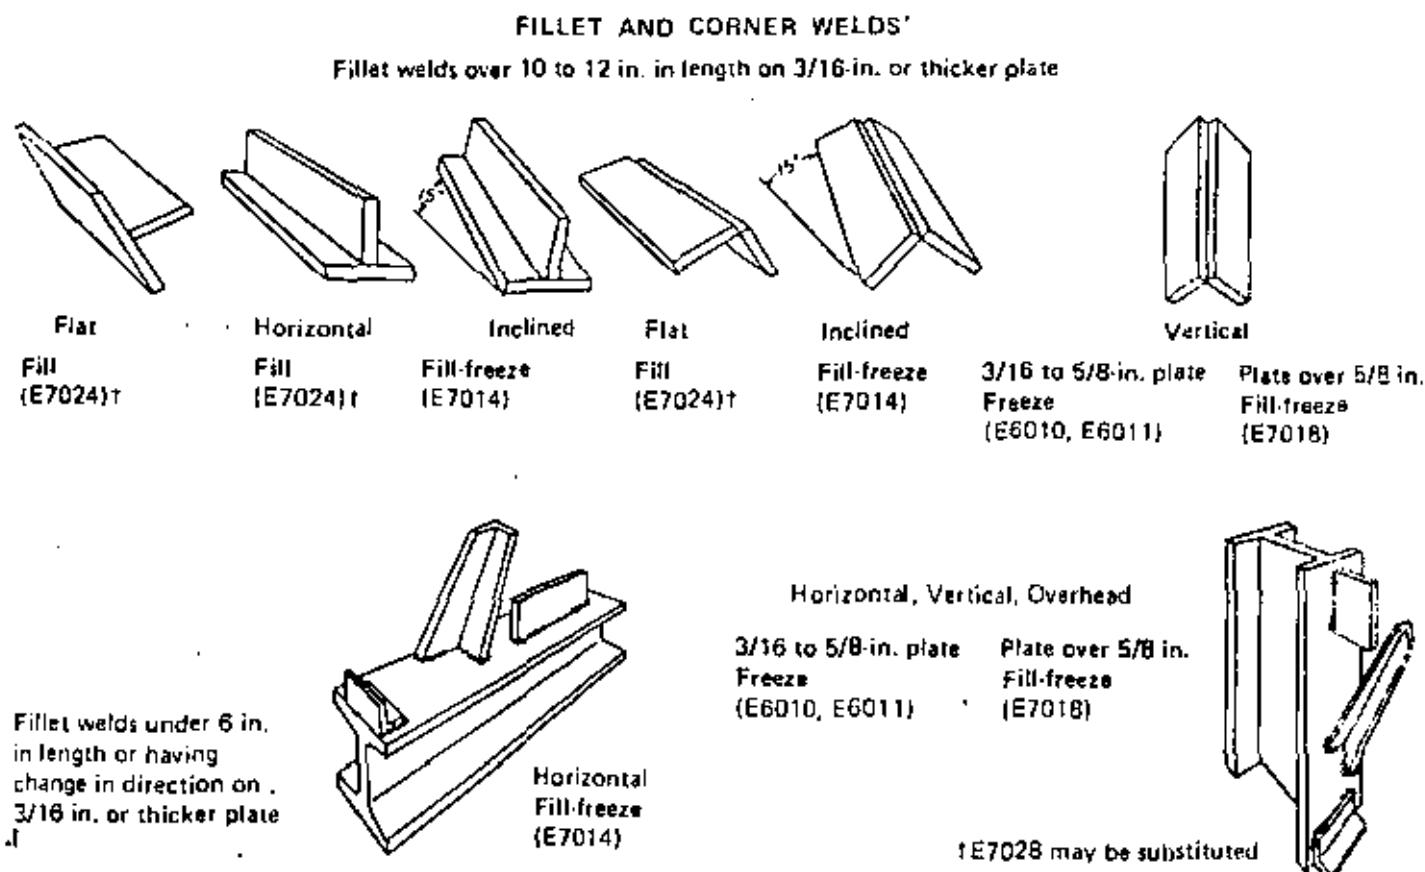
Guide to selection of electrodes for fillet and corner welds.
